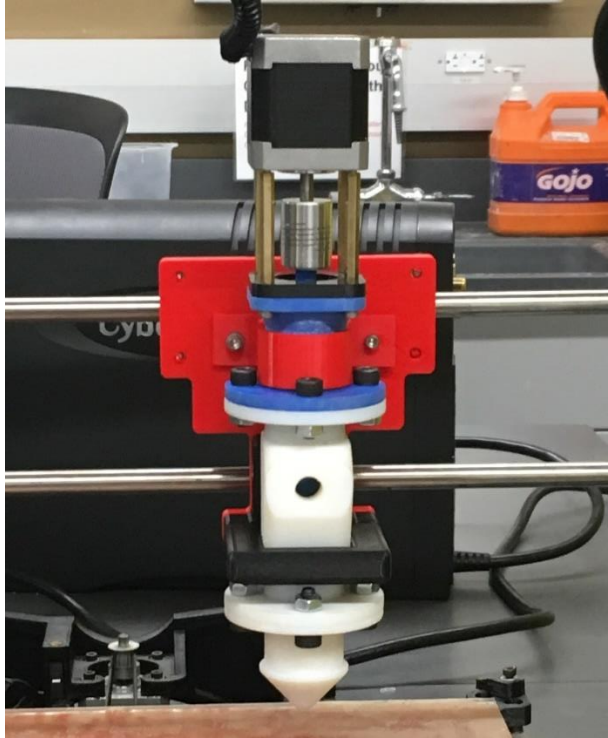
Auger Extruder Assembly Attached to the LulzBot
